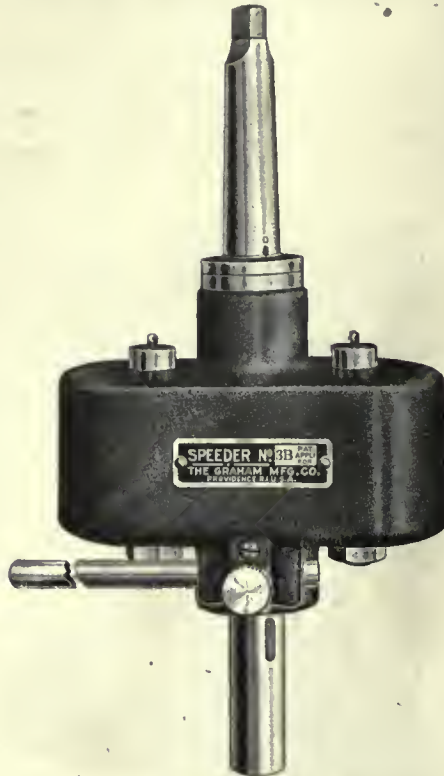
SHOWING SPINDLE FOR TAPER SHANK DRILLS INSTEAD OF CHUCK.
